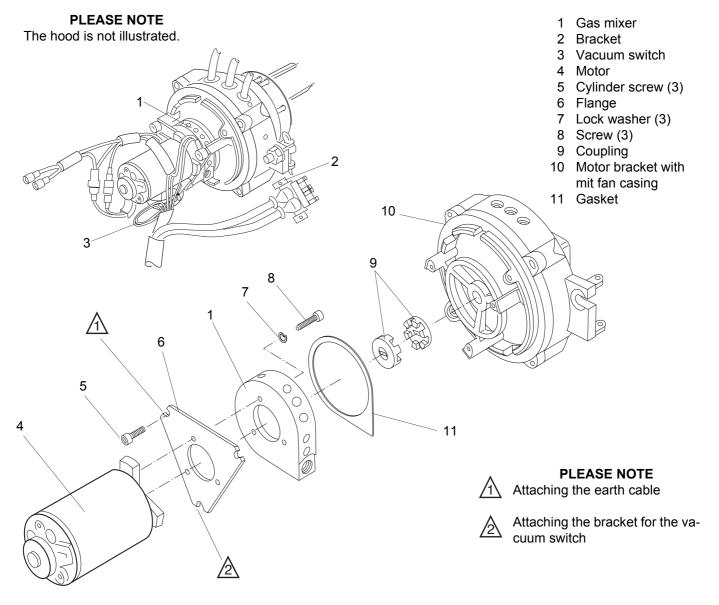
Burner head disassembly and reassembly (page 1 of 2)
